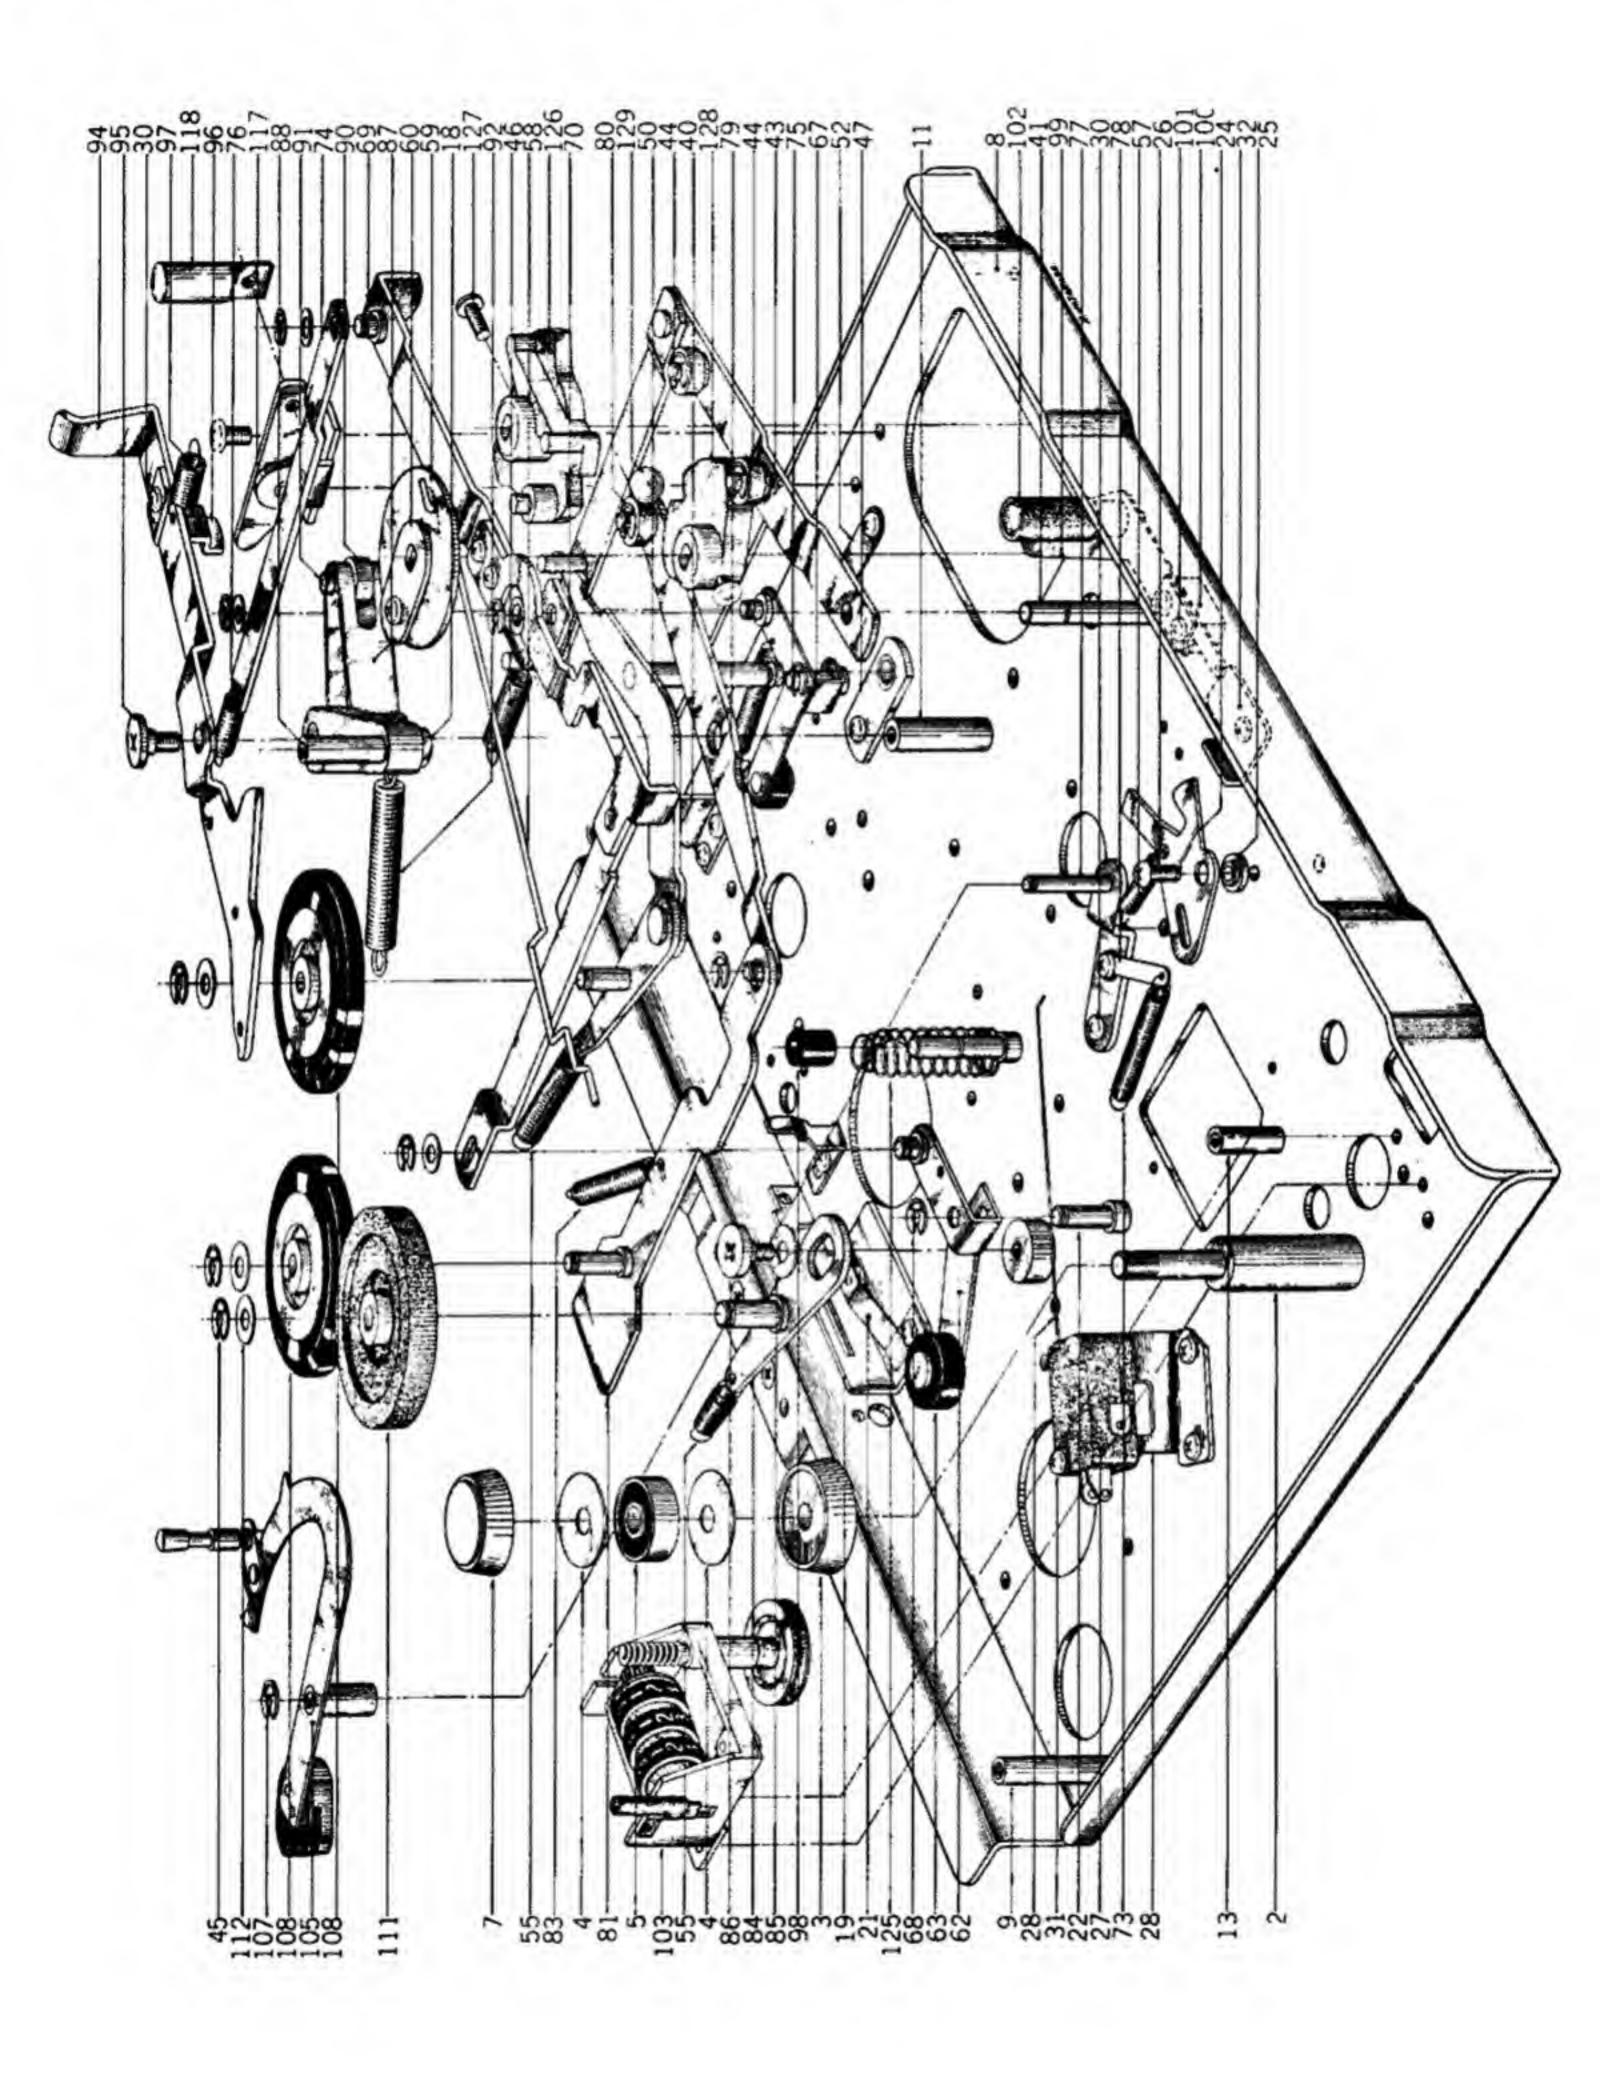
ILLUSTRATION OF SWITCH BLOCK
